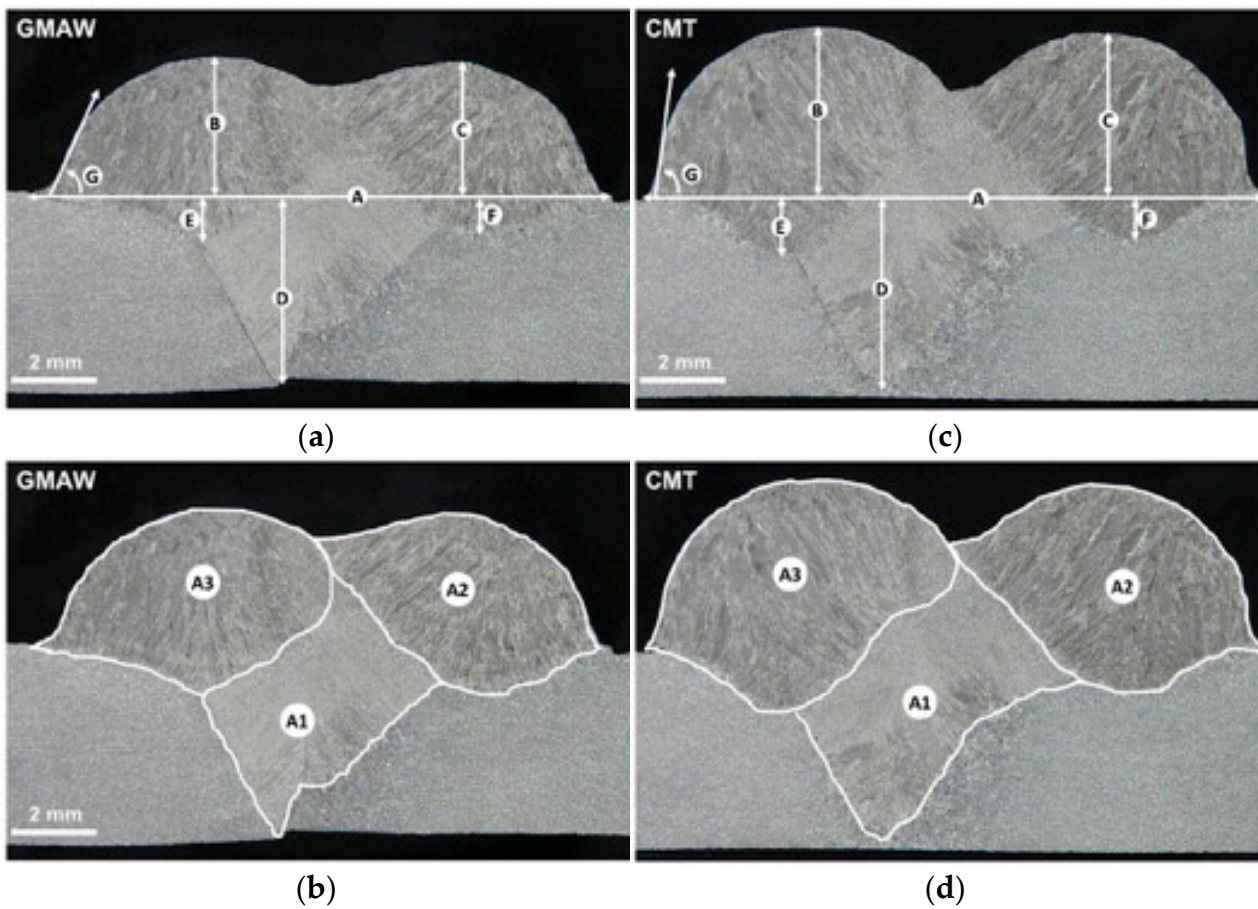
Optical macrographs showing the welding cross-section for standard GMAW (a,b); and for the CMT joints (c,d). The highlighted letters on each macrograph are the main area and dimensions related to each welding pass and are presented in Table 7.
